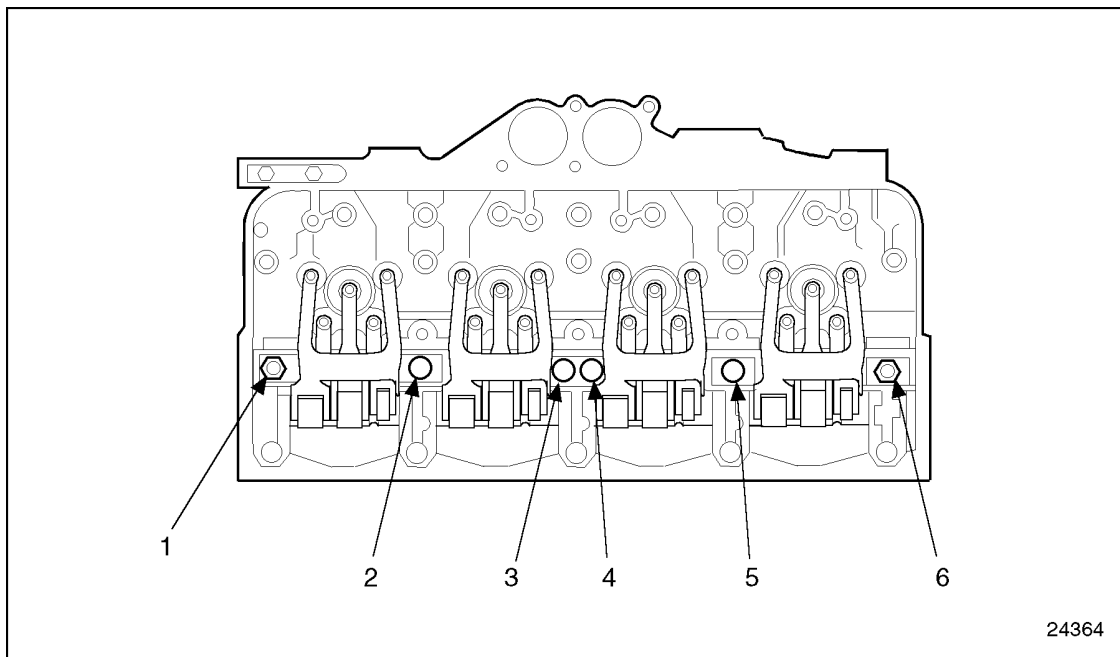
Rocker Arm Shaft Bolts and Nut Identification Numbers
